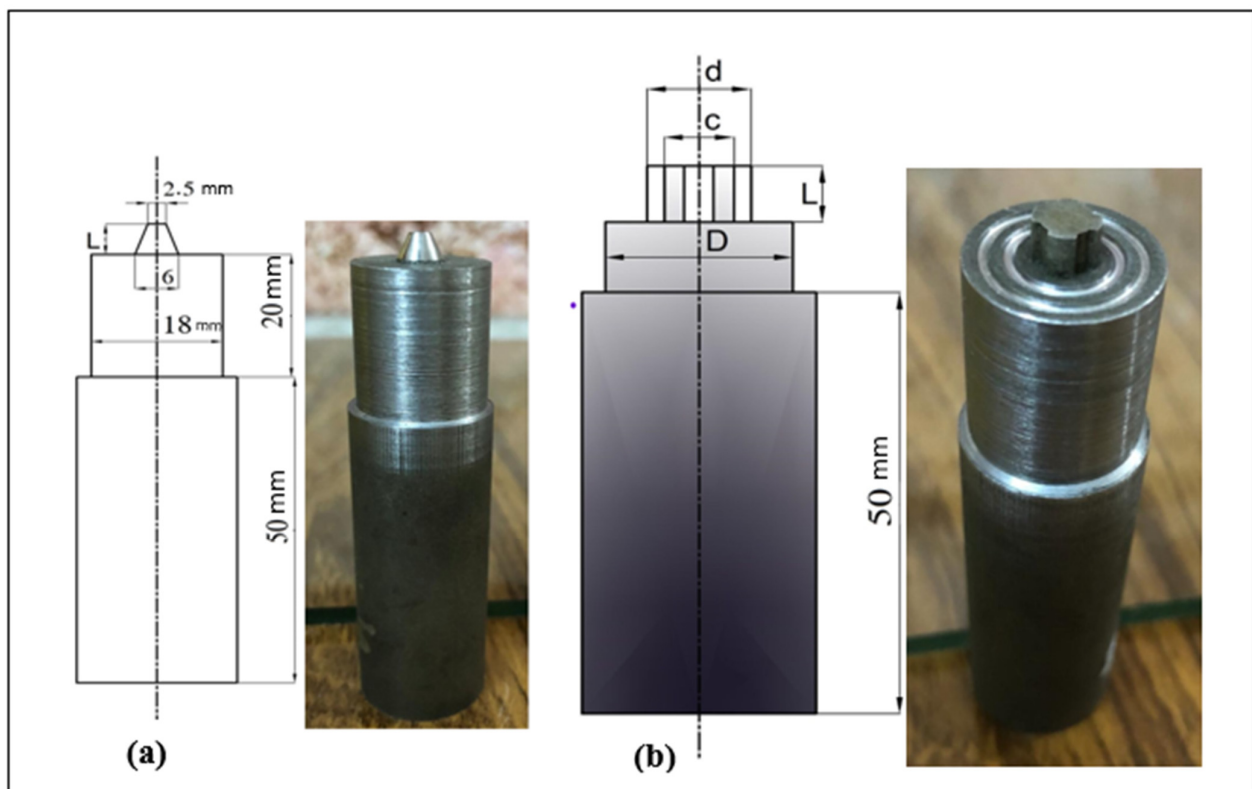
(a) Normal tool design (L = length of pin tool (less than the thickness of material to be welded (0.1, 0.2, 0.3 mm)). (b) New tool design.
